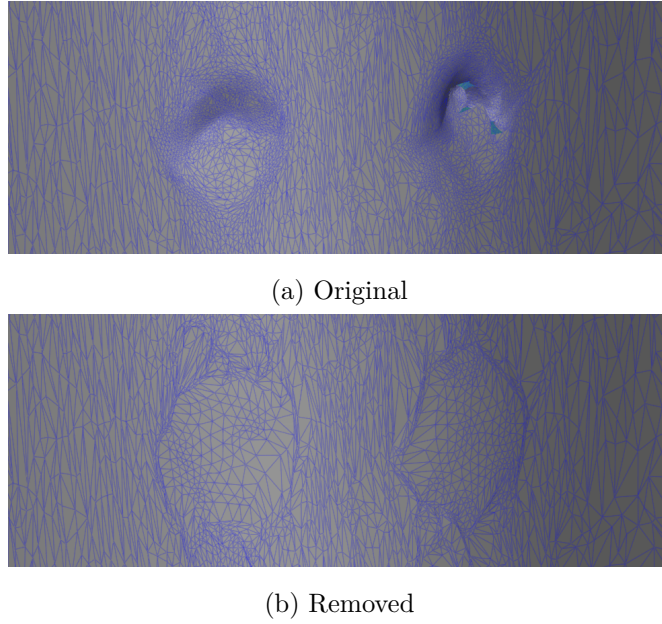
Close-up view of two LE cooling holes closed with BladeCLeaner
